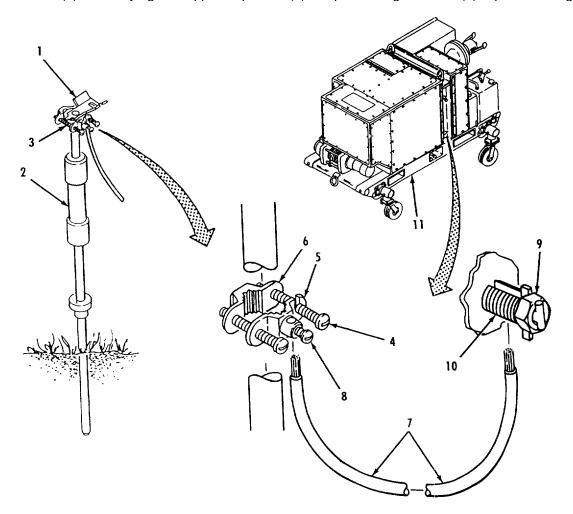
600 GPM Pump Ground Rod Removal.
